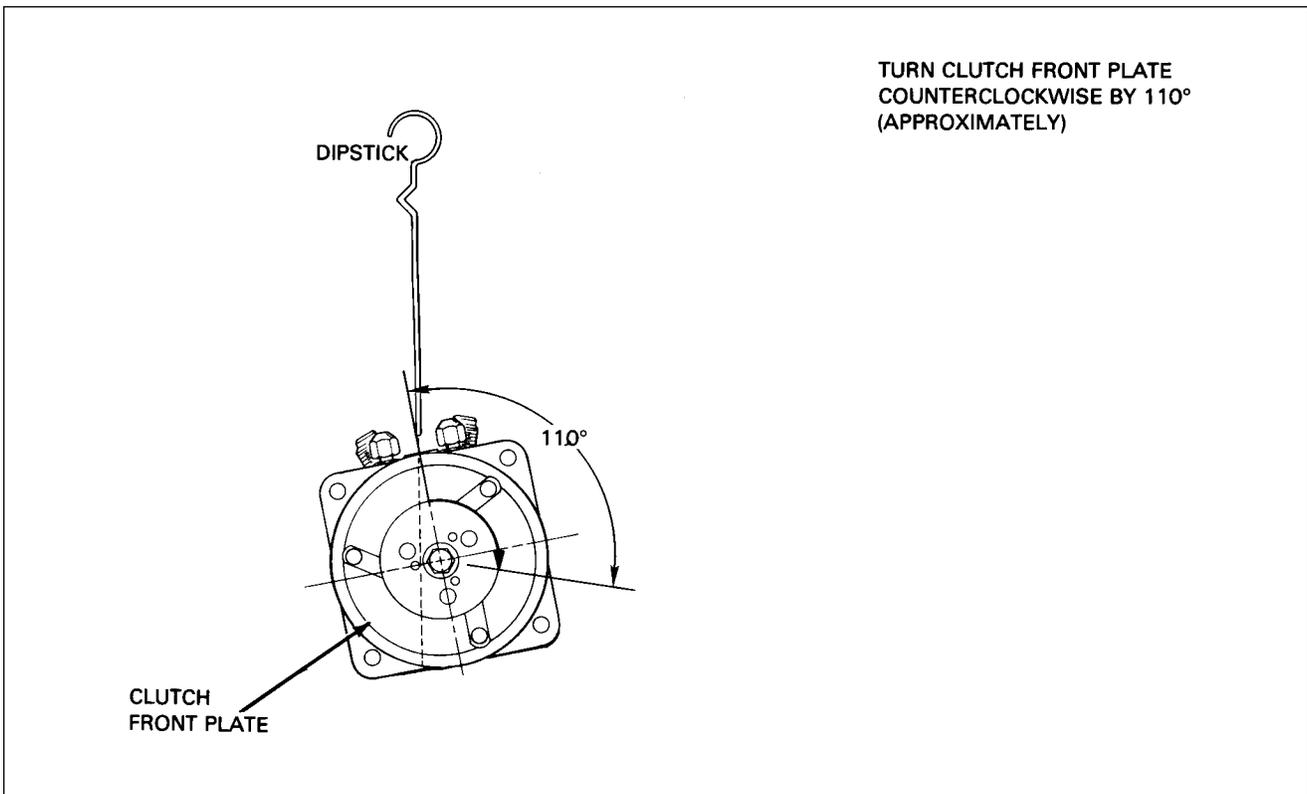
Rotation of Clutch Front Plate (Sankyo Compressor Oil Check)
